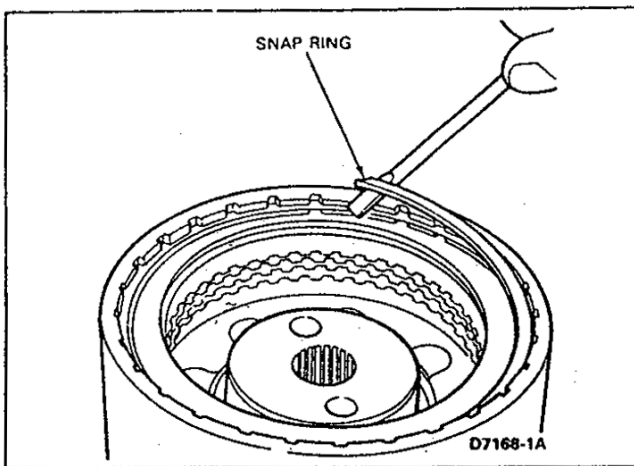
Removing Forward Clutch Pressure Plate Snap Ring
